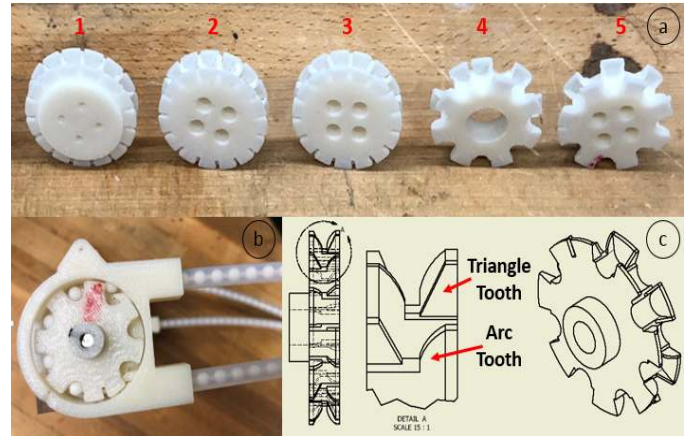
Sprocket design: (a) Iterative design of the sprockets. The rightmost prototype is currently used in the device. (b) Assembly of sprocket, beaded chain and nylon tubing. (c) Asymmetrical teeth smoothing the engagement between the chain and sprocket.
